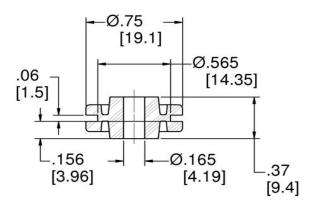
Part Dimensions - J-3112 Series (#8 Screw, With Plain Ferrule)
